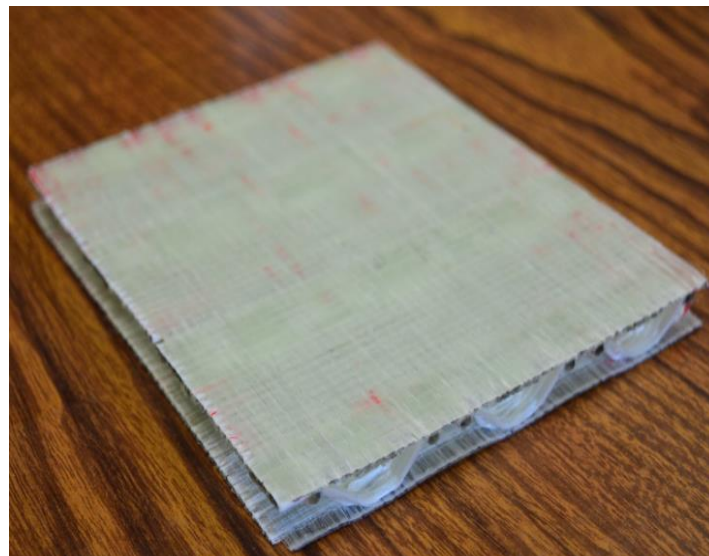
Finished 3D Printed Navtruss Sandwich Panel
